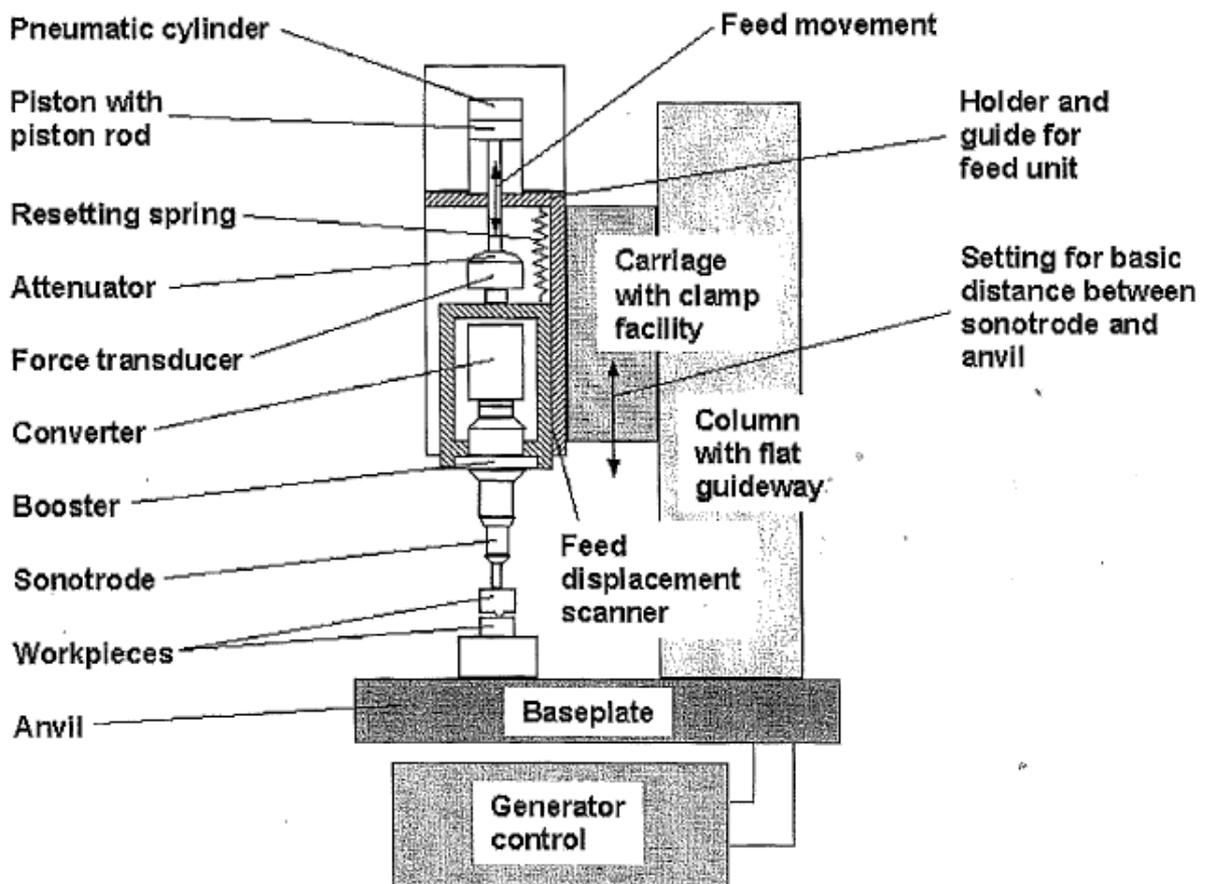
Basic construction of a pneumatic ultrasonic welding machine
